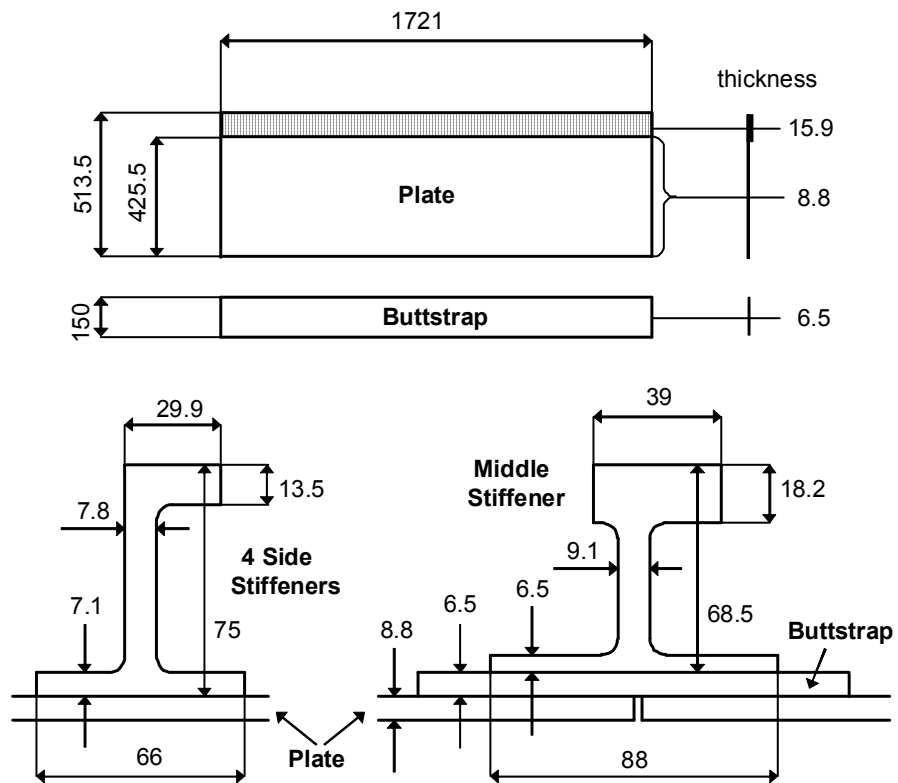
Geometry details of plate, buttstrap and stiffeners
